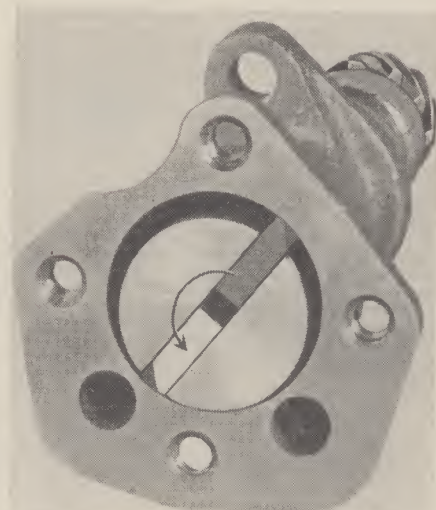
Oil pump vanes should be installed so that the flat sides will face in the direction of rotation.
